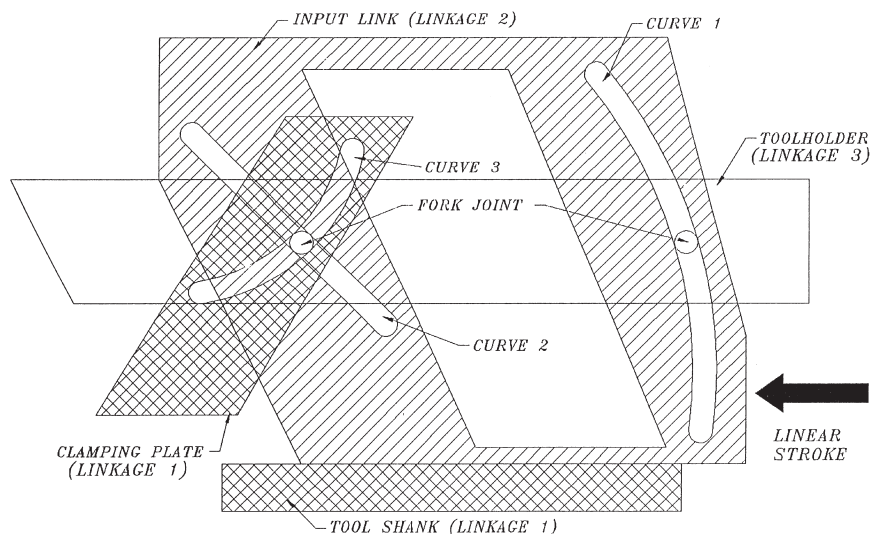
Schematic diagram of the new CNC tooling mechanism.
